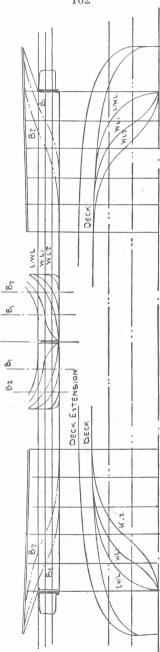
Sheer Draught Double Ended Ferry Boat.
